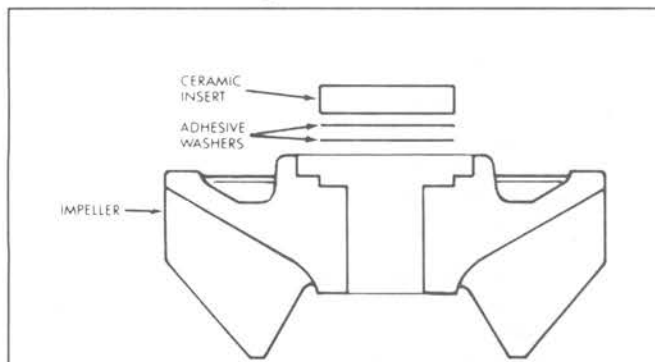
Insert, Adhesive Washer, Impeller Stackup
